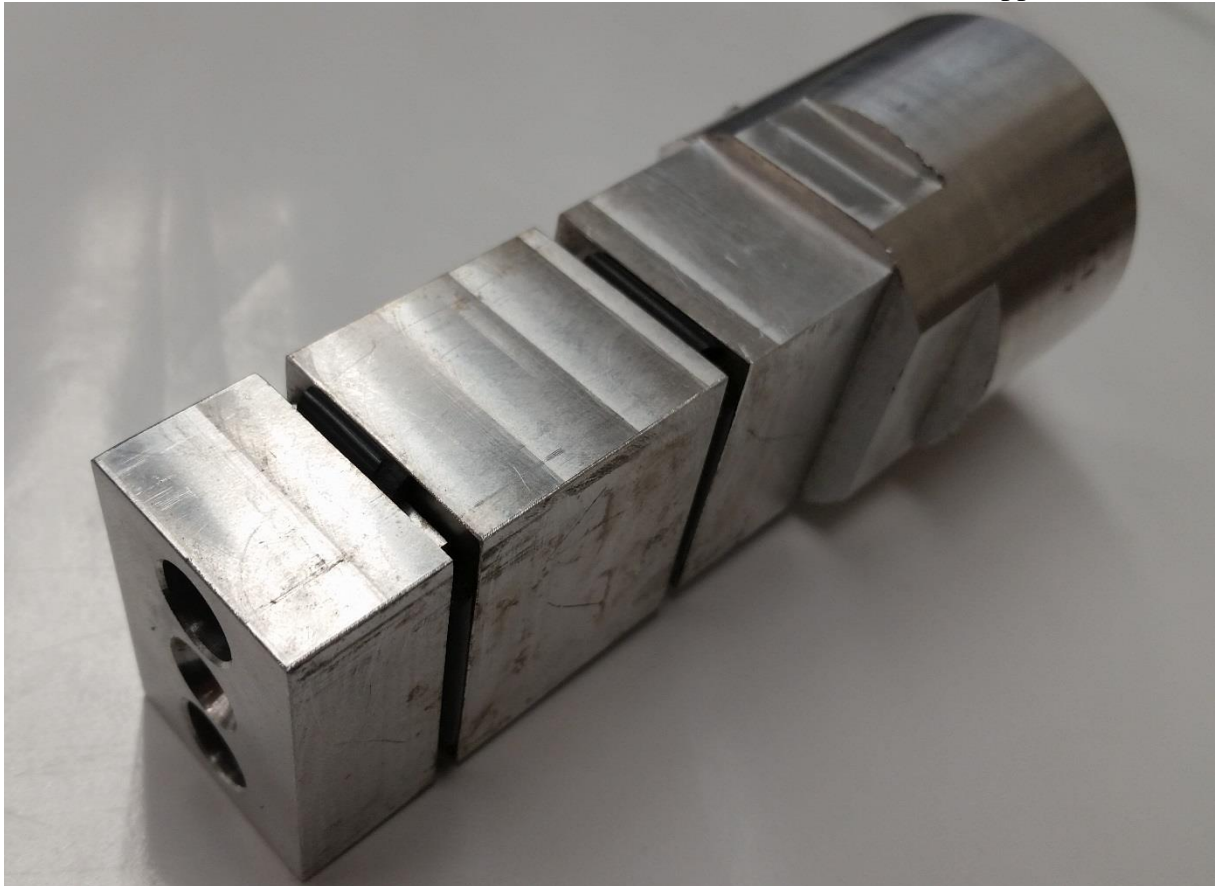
An image of the finished fixture that supported the infill mallet during machining.
